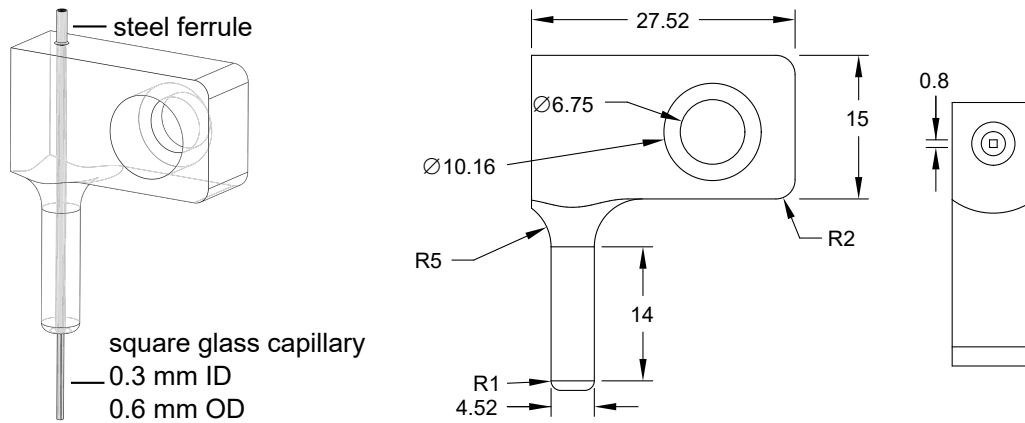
Support writing assembly. Dimensions of 3D printed adapter are shown in mm.
